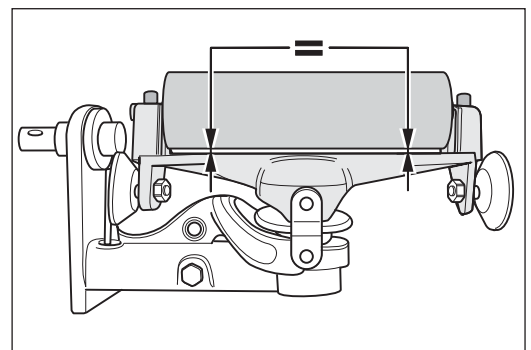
the tensioning roller is positioned parallel to the top of the drive unit.
